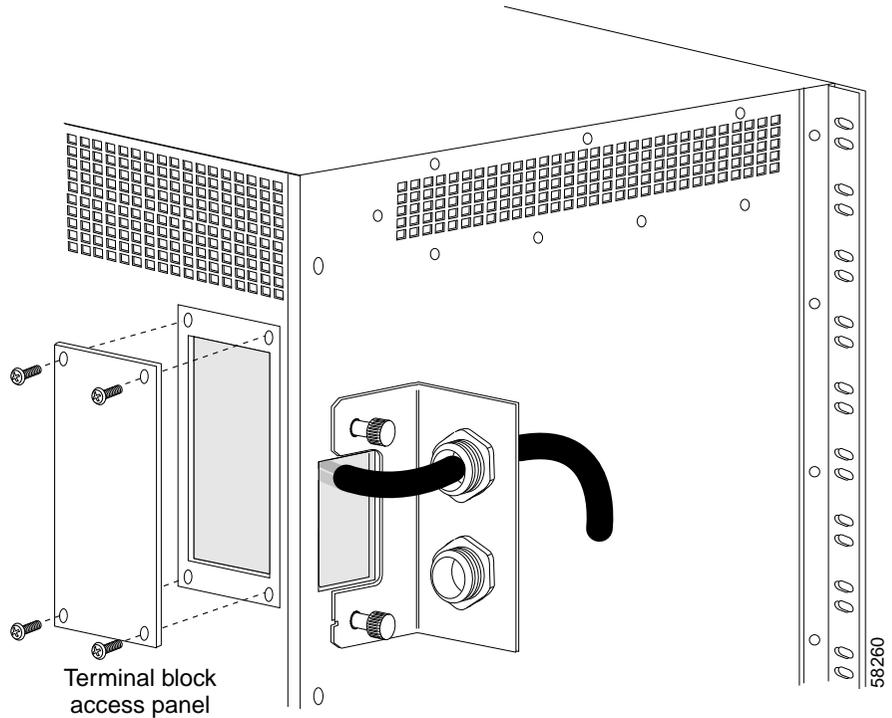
Connecting Cable Wires to the Terminal Blocks
